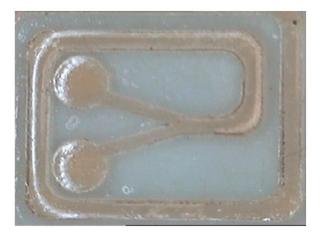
Fabricated master mould showing two inlet and fabricated master mould showing two micro channels chamber.
